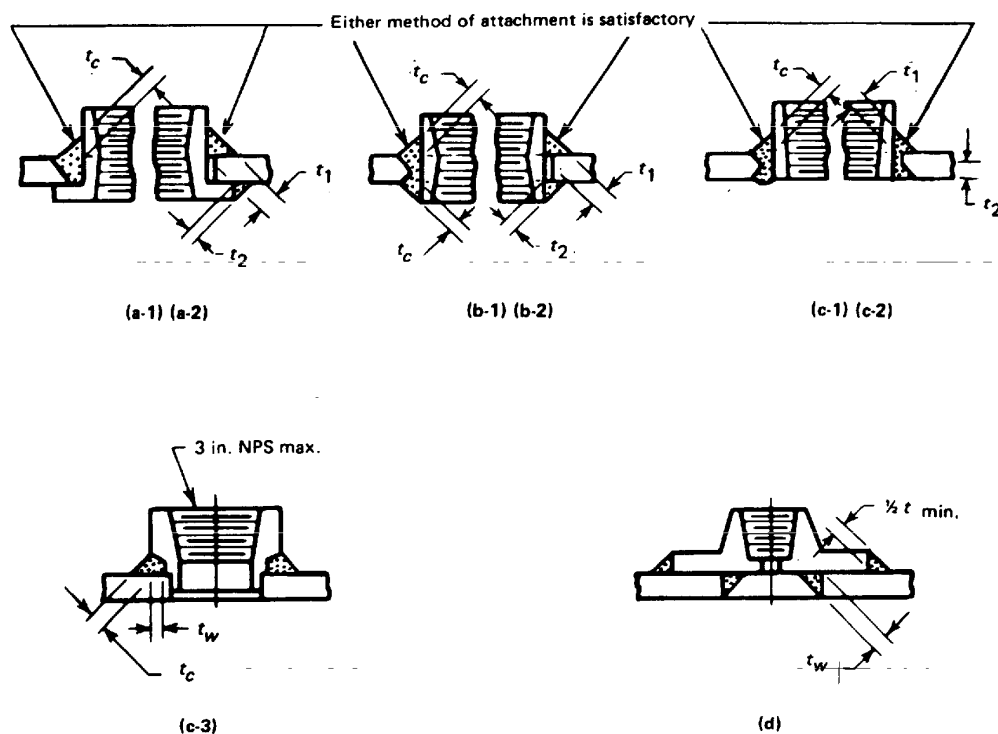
(e)-1 SOME ACCEPTABLE TYPES OF WELDED NOZZLES
